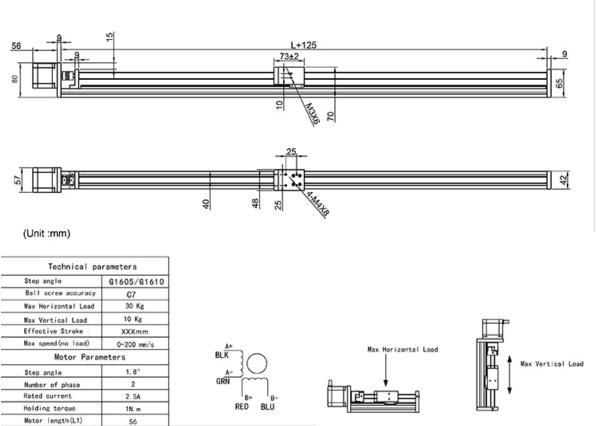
Manufacturer's Schematics and Technical Specs [9]
